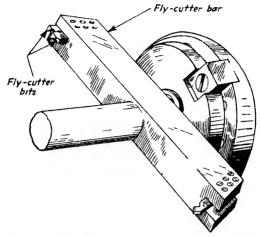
Details of one of a pair of fly cutters used as straddle mills
